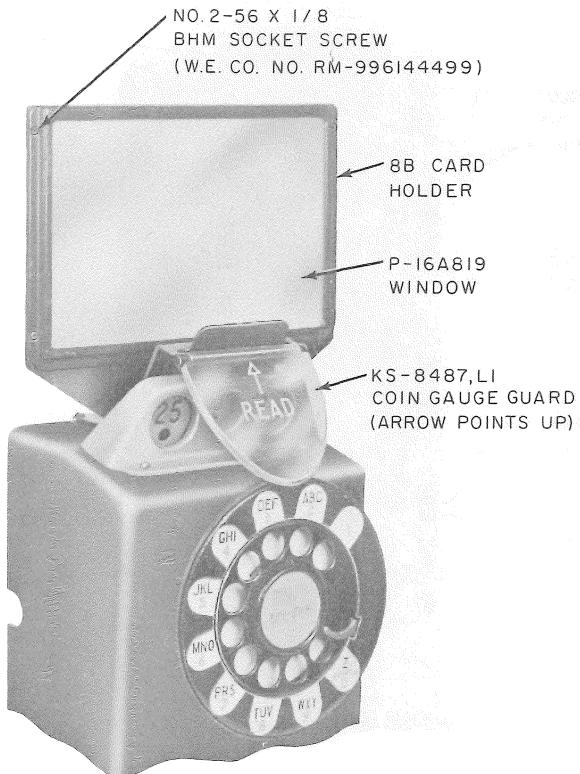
Dial Type Coin Collector Equipped with Coin Gauge Guard
